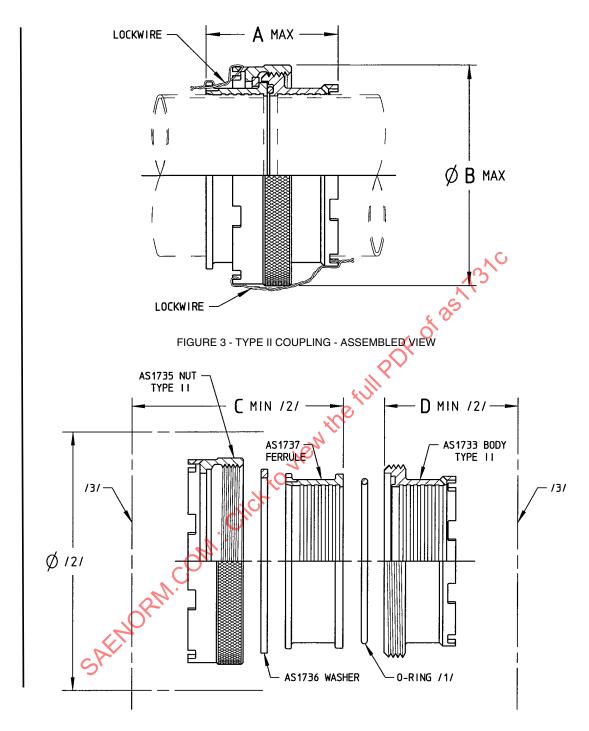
TYPE II COUPLING - EXPLODED VIEW
